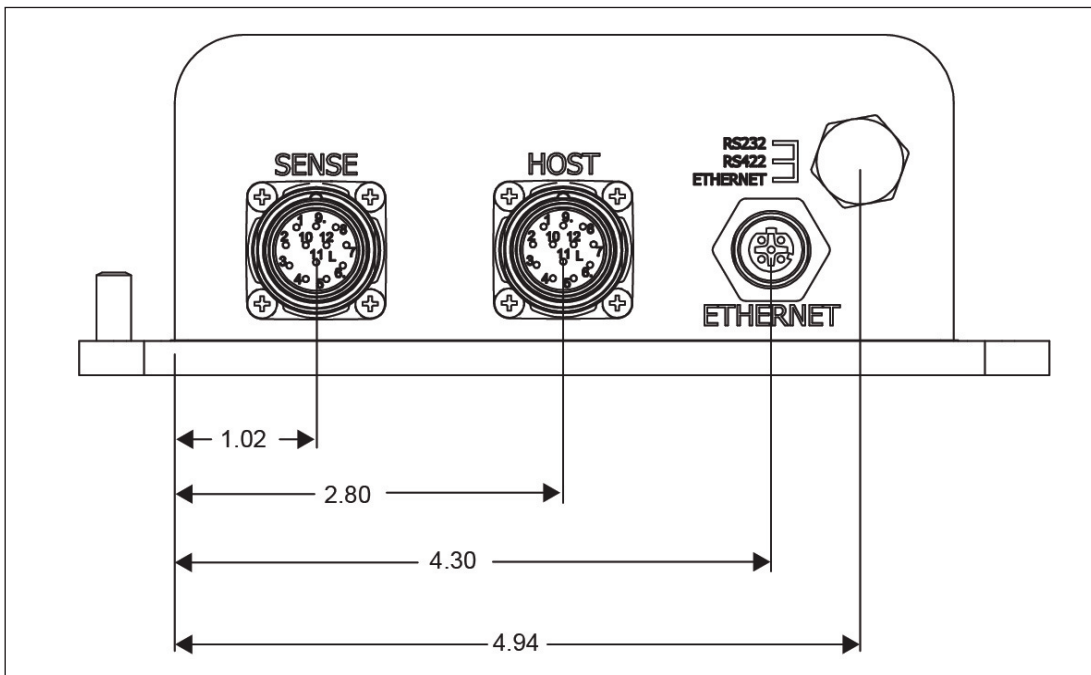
MPRX End Panel Dimensions with Communication Connectors
